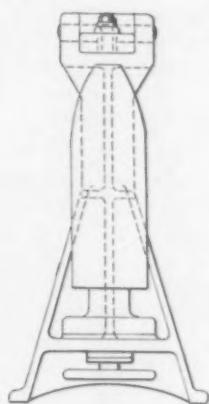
AN ADJUSTABLE THREE-CUTTER BORING HEAD FOR ROUGHING AND FINISHING THE INSIDE OF SHELL
